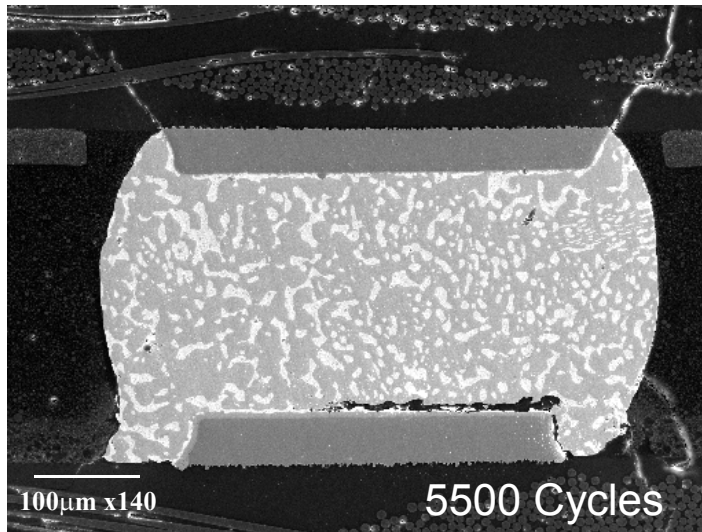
Failure Mode for Underfilled BGA Solder Joint Fatigue Cracking
